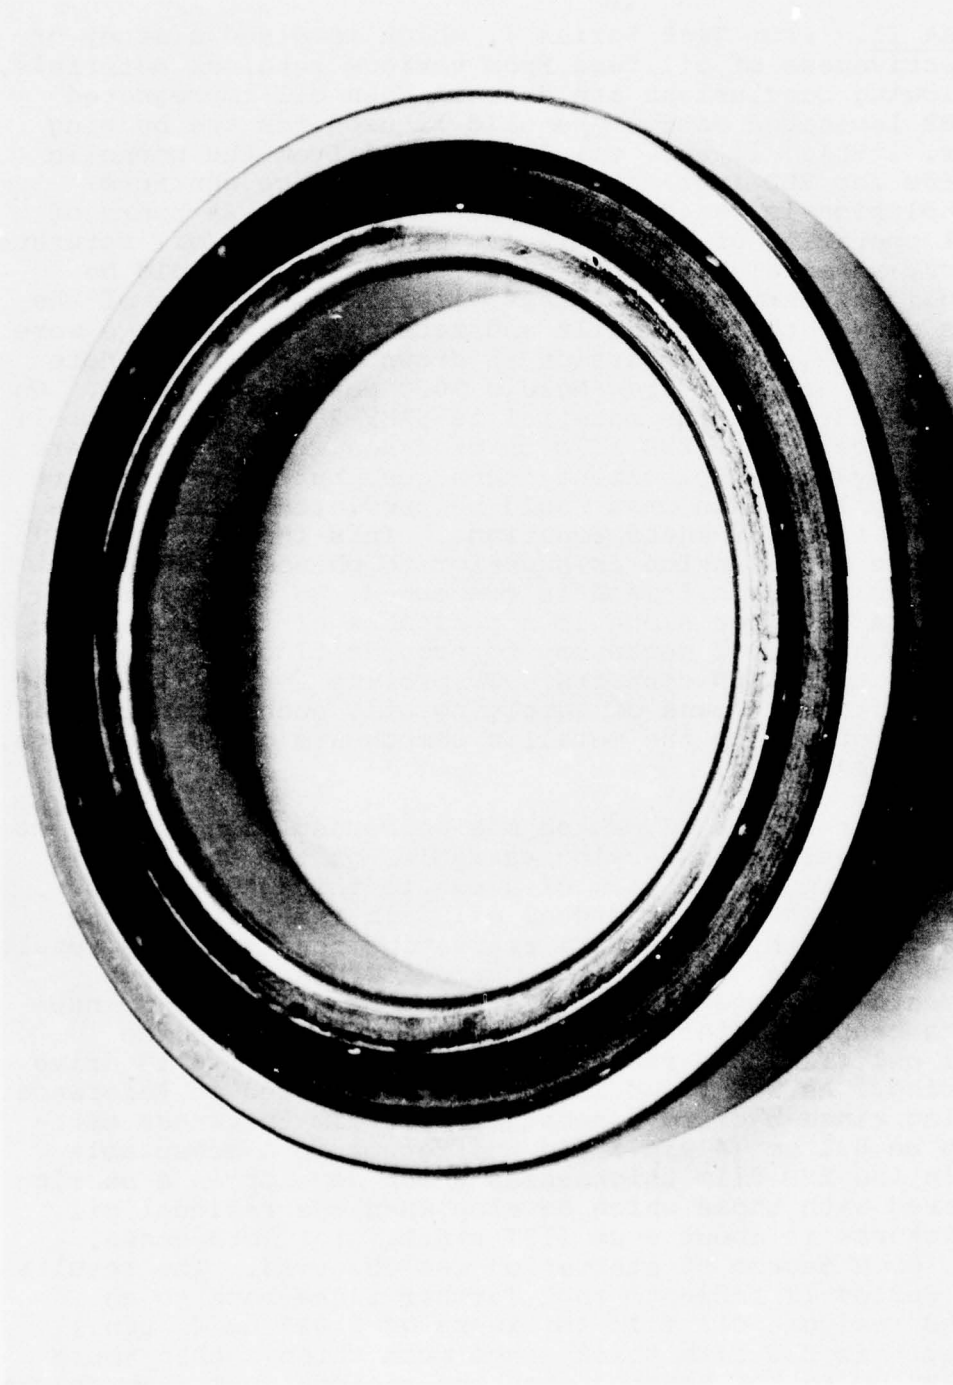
Assembled Aft Bearing Showing Wear on Inner Race
